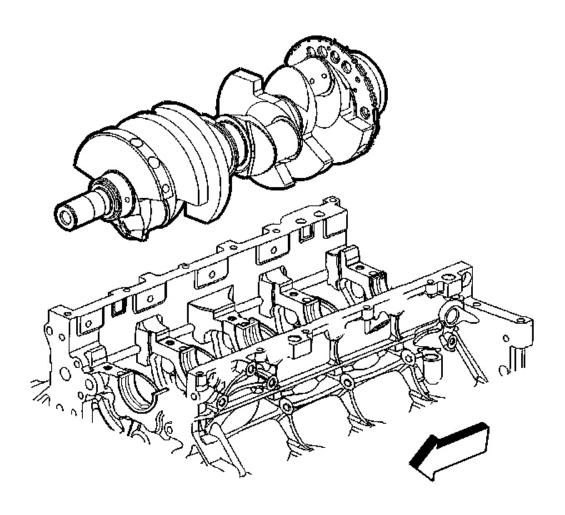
View Of Crankshaft & Engine Block Courtesy of GENERAL MOTORS CORP.
